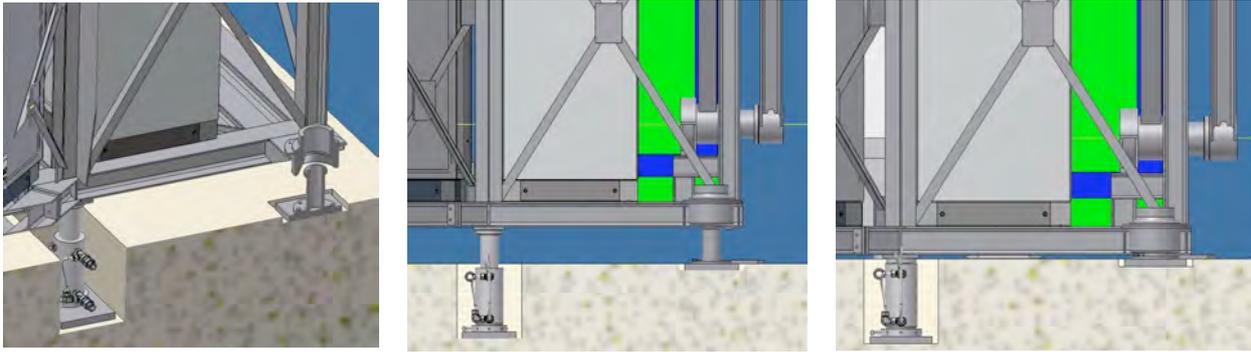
Isometric and side view of the hydraulic jack and UTE centring pin
